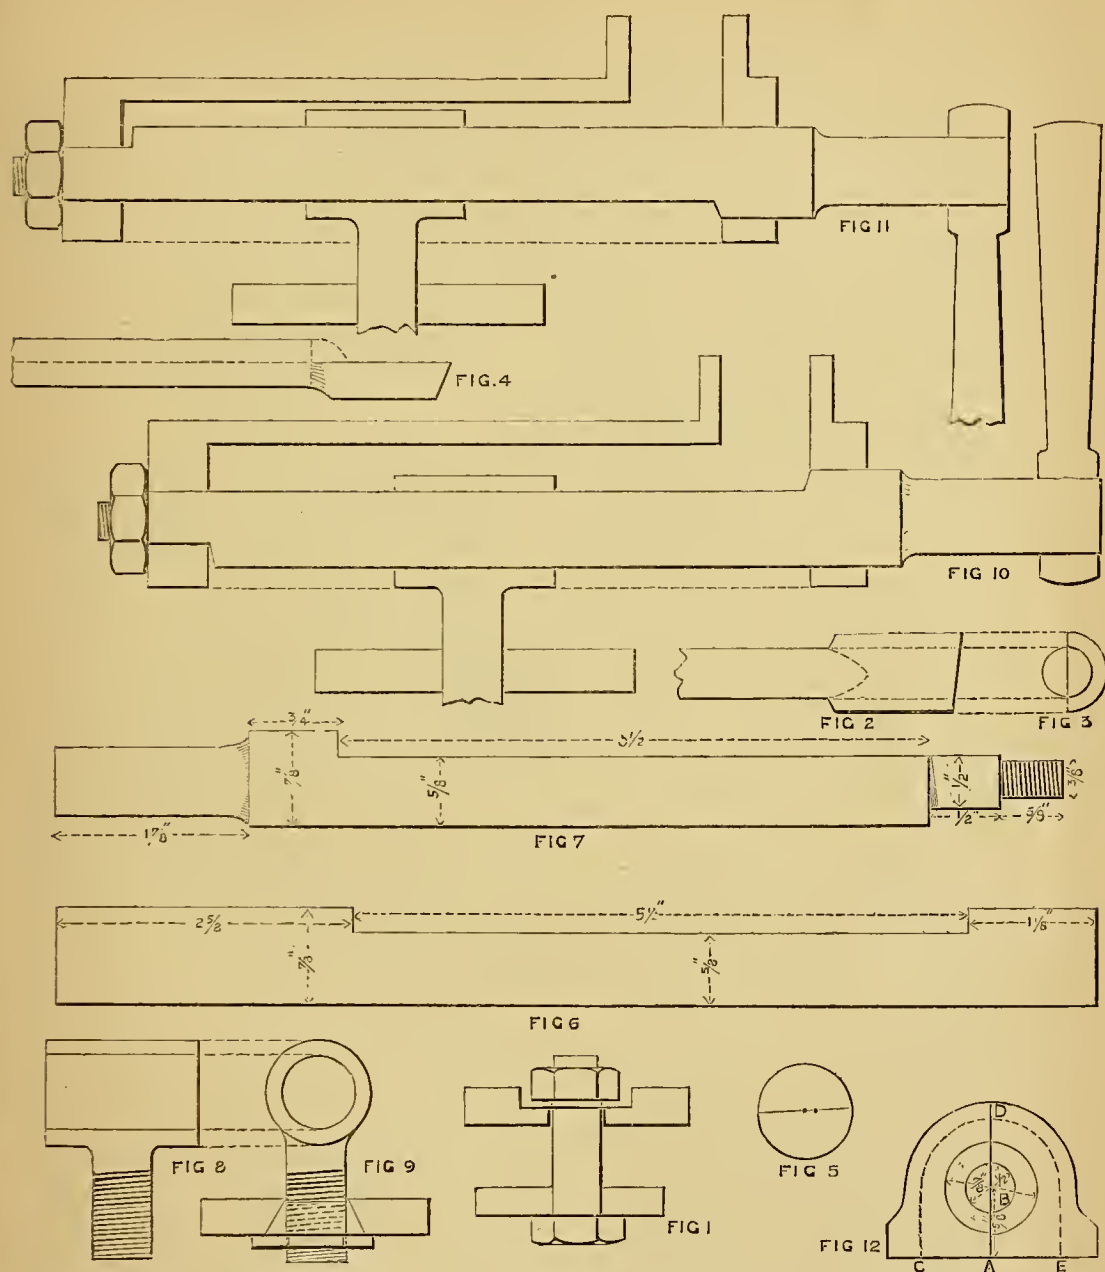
OLD FORM OF REST. FIGS. 2, 3, 4.—FRONT, END, AND SIDE VIEW OF CIRCULAR DRILL. FIG. 5.—END OF ECCENTRIC SPINDLE. FIG. 6.—ECCENTRIC SPINDLE PARTLY TURNED. FIG. 7.—ECCENTRIC SPINDLE FINISHED. FIGS. 8, 9.—STIRRUP, CLAMPING PLATE AND NUT. FIGS. 10, 11.—DIAGRAMS ILLUSTRATING ACTION OF REST. FIG. 12.—END OF REST, DOTTED LINE C D E REPRESENTS ABOUT CAVITY.
